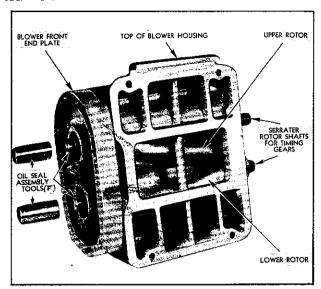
Assembling Blower Rotors into Housing— Front End Plate Attached.
